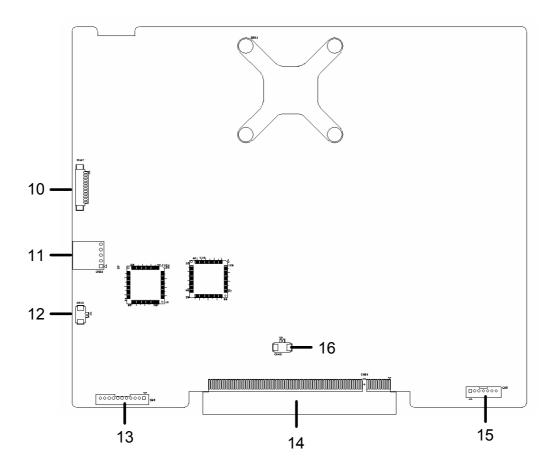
Bottom side global view of POC-S1X7 motherboard indicates connector locations
